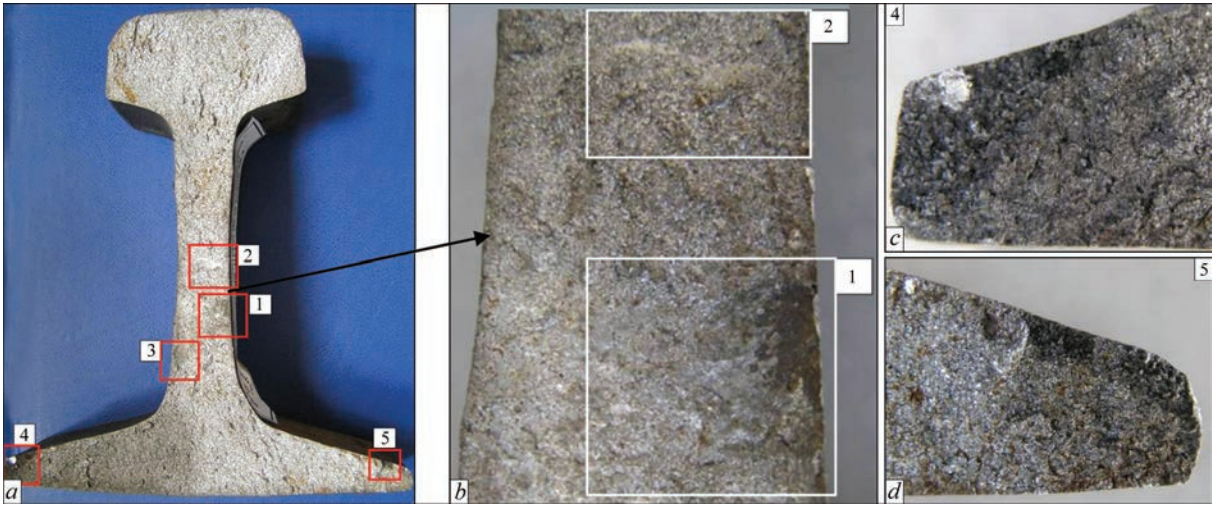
Fracture of welded rail (*a*), defects in the rail web (*b*) and foot (*c*, *d*)
